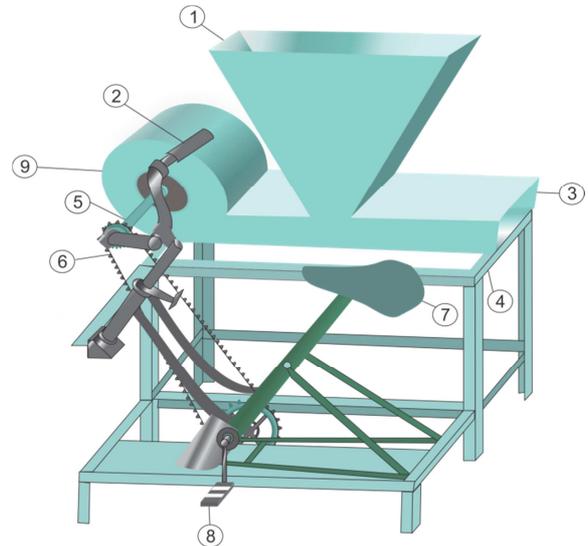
Isometric drawing of Pedal-Operated Rice Winnower.
